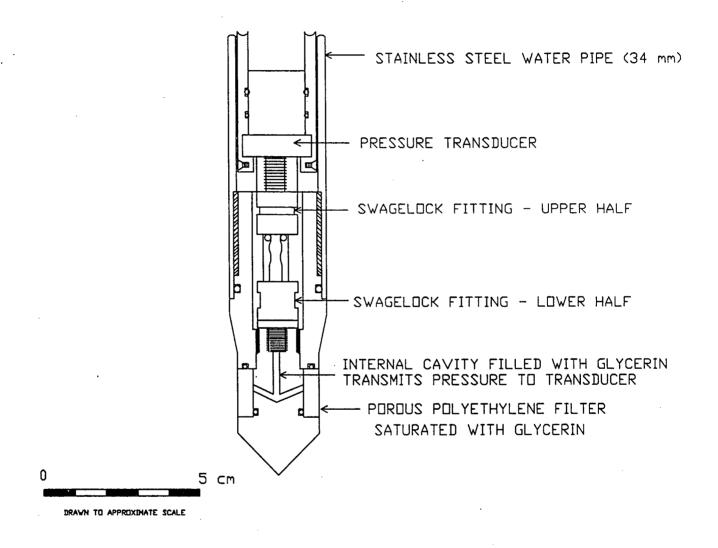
Cross section of UBC designed and manufactured piezometer tip.
